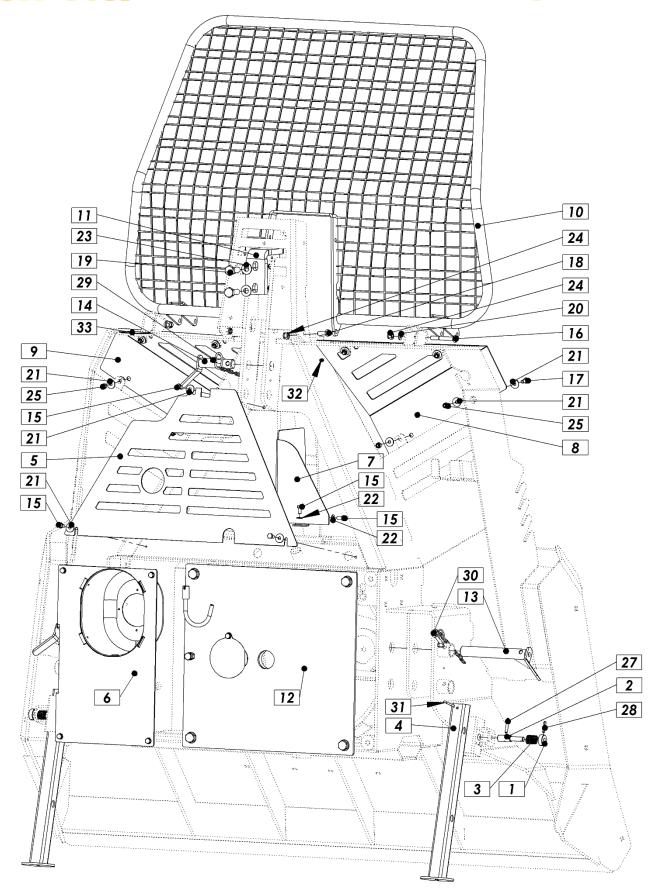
7002.13.00.0 / 7004.13.00.0 – Protections and mechanisms.
